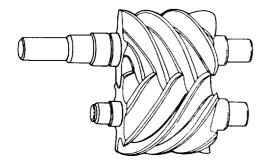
Male and female screw type of air compressor rotors (matched set).
